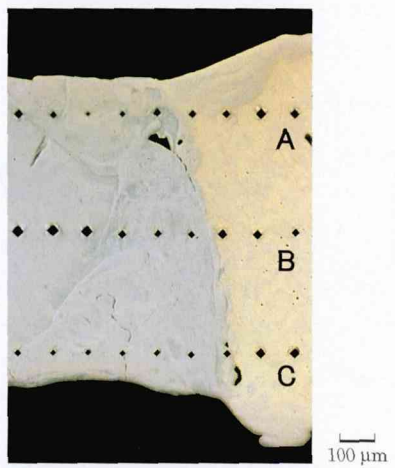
Structure of a welded surface by a metallographic microscope (TI-AU)
